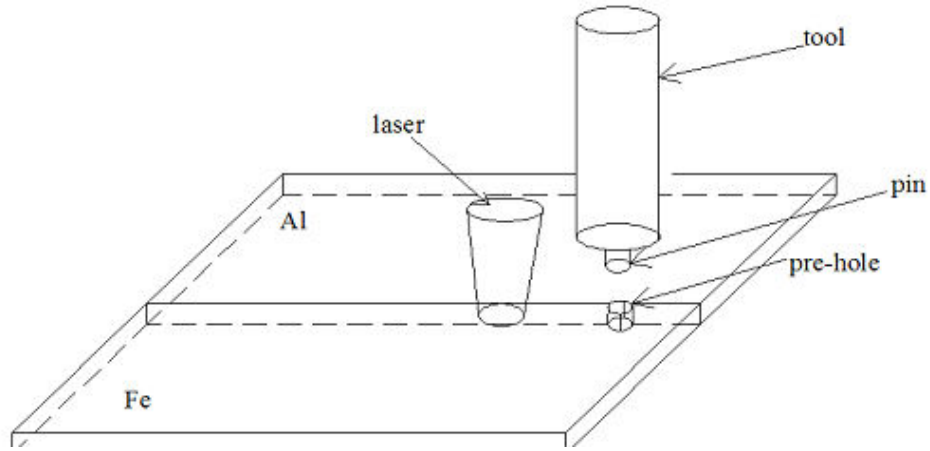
Offset welding of Iron and Aluminum(Fei, et al., 2015)
